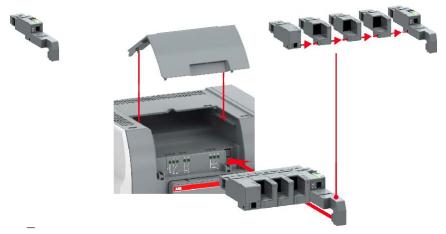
Mounting of the auxiliary power supply module OXEA1 and Ekip –modules
